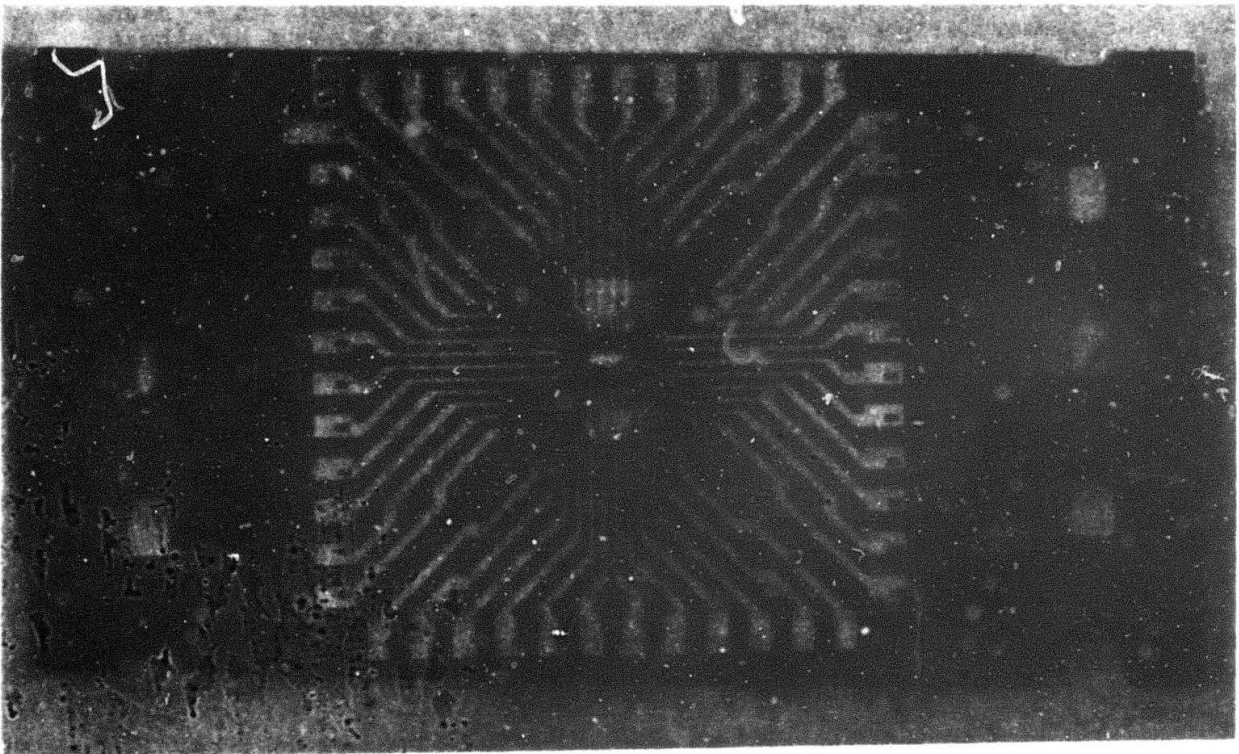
TAB TECHNIQUE CHIP SOLDERED TO CARRIER STRIP
